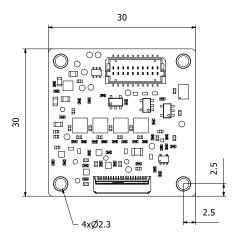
Mechanical drawing of the MR-E-3 proxy board (unit: mm).
